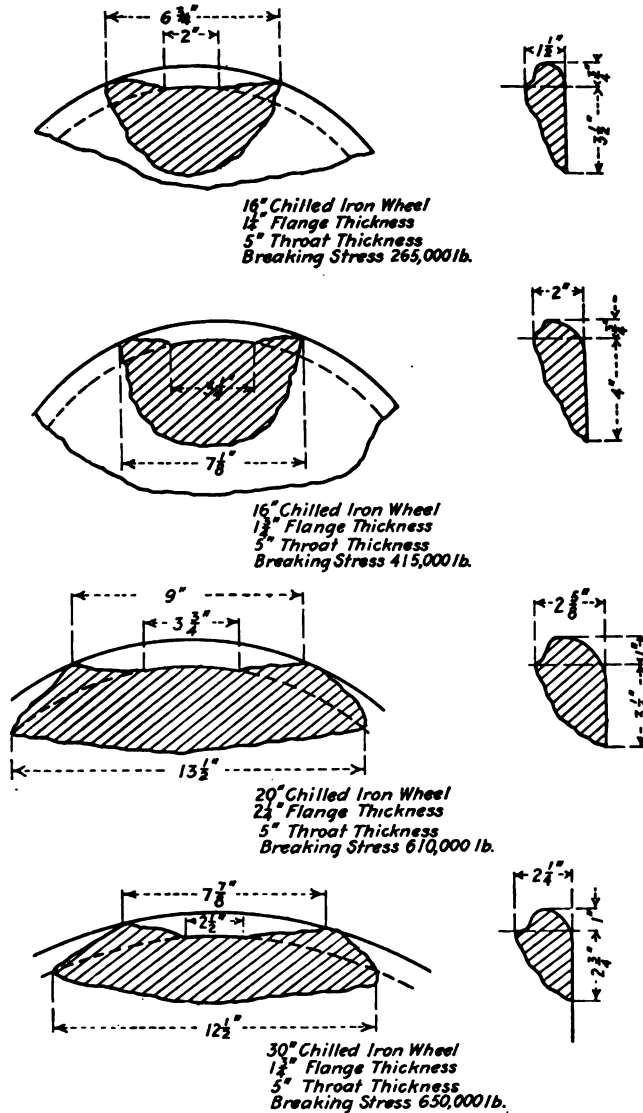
TYPICAL FRACTURES OF VARIOUS CHILLED IRON CRANE WHEELS TESTED
